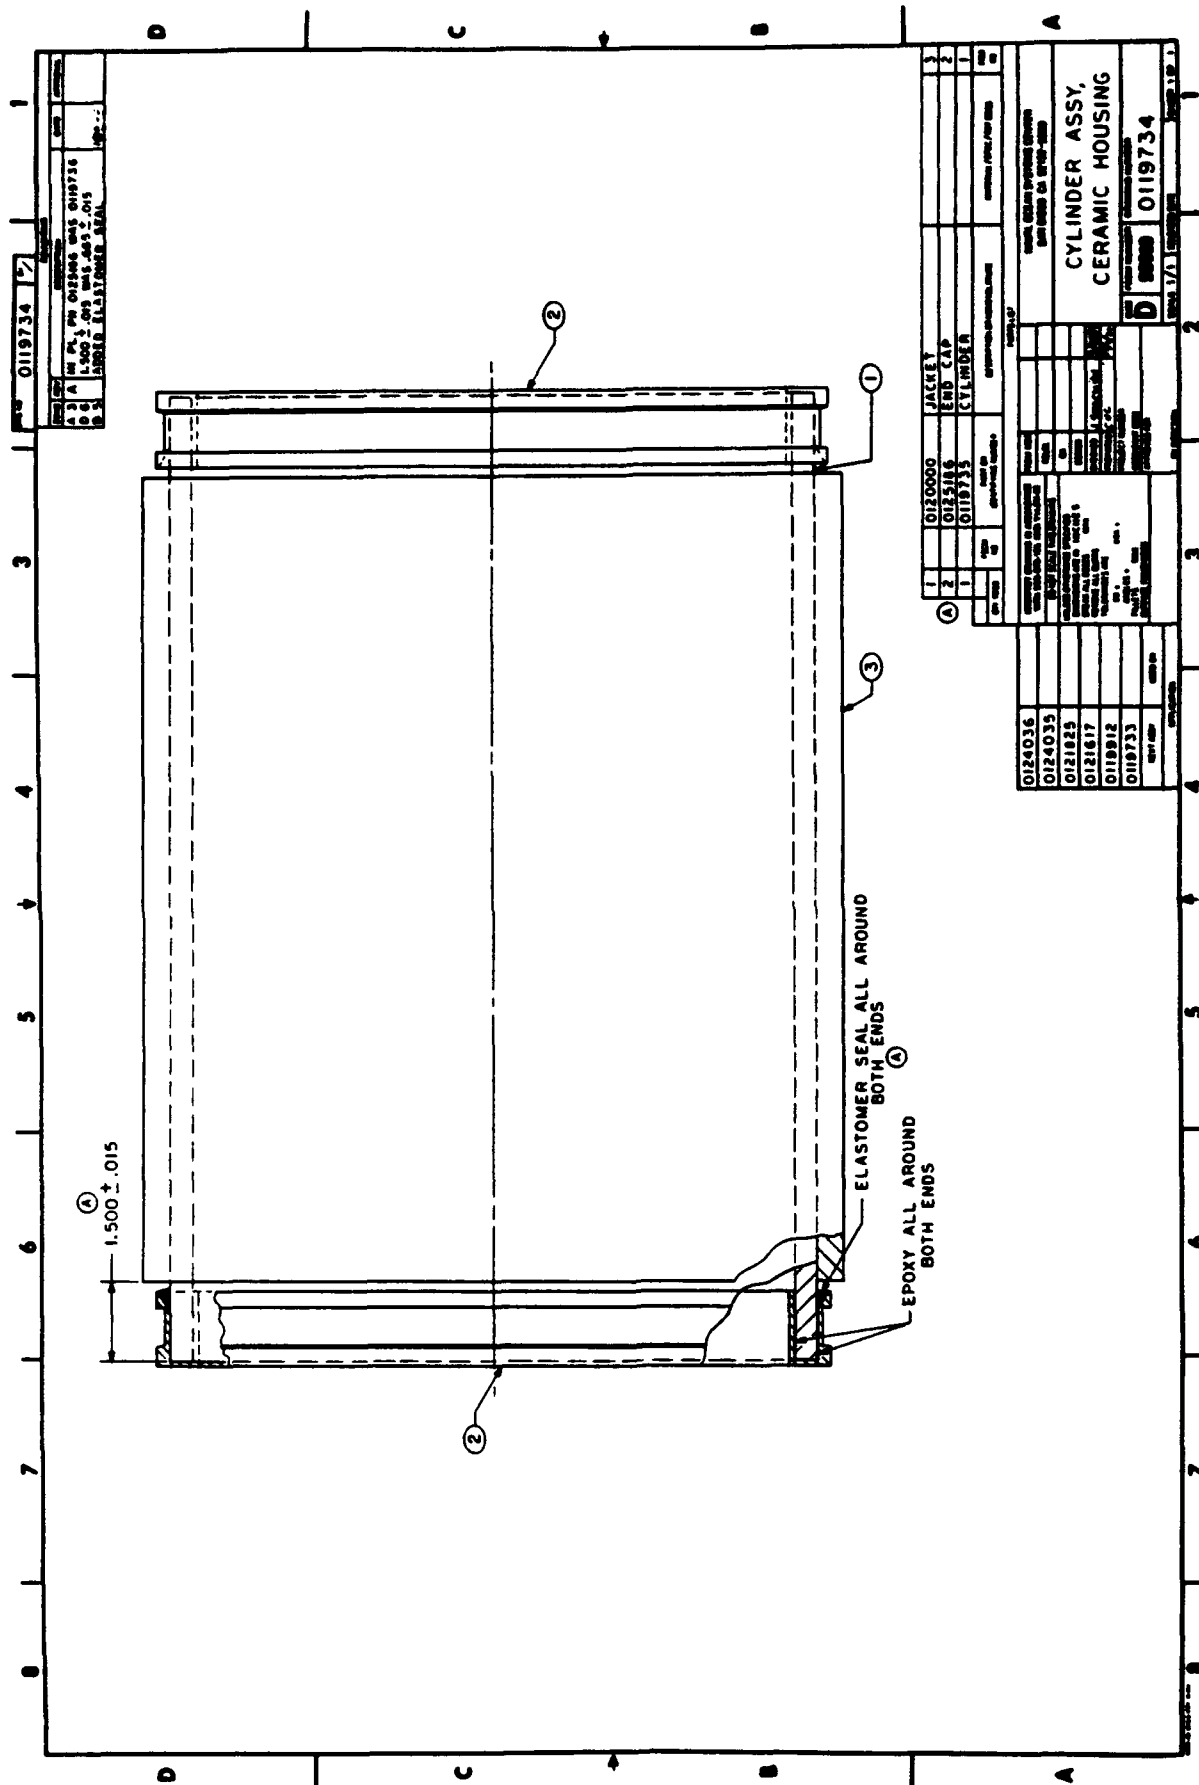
12-inch-diameter cylindrical ceramic housing section equipped with Improved Mod 1 end caps.
